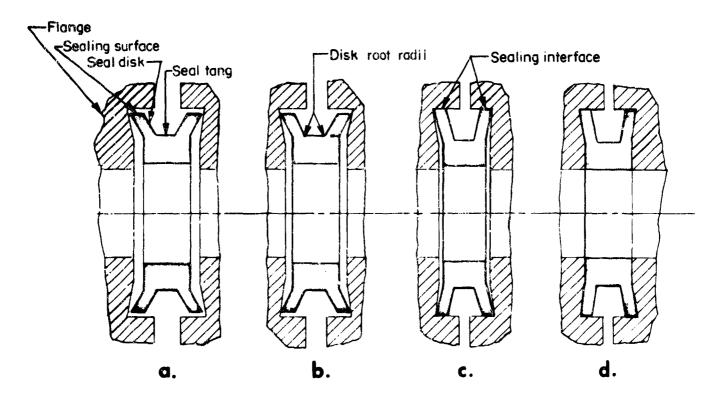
FOUR STAGES OF BOBBIN SEAL ASSEMBLY
